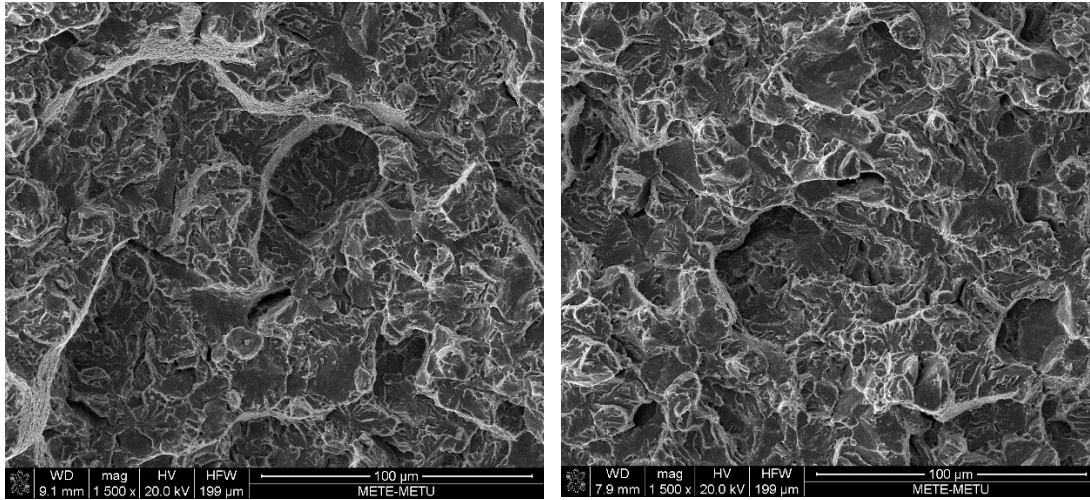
Fracture surfaces of Charpy impact test specimens of tempered martensite at 220°C, 5hr.
